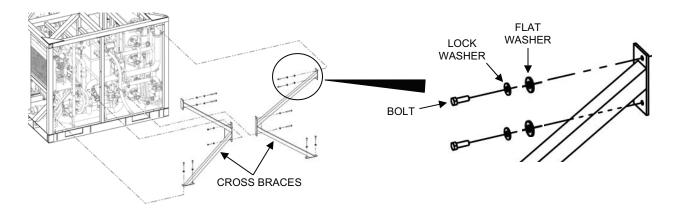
TWPS Frame Cross Brace Installation – Right End.
